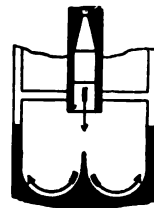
Double-bucket arrangement of Stumpf Steam Turbine.
